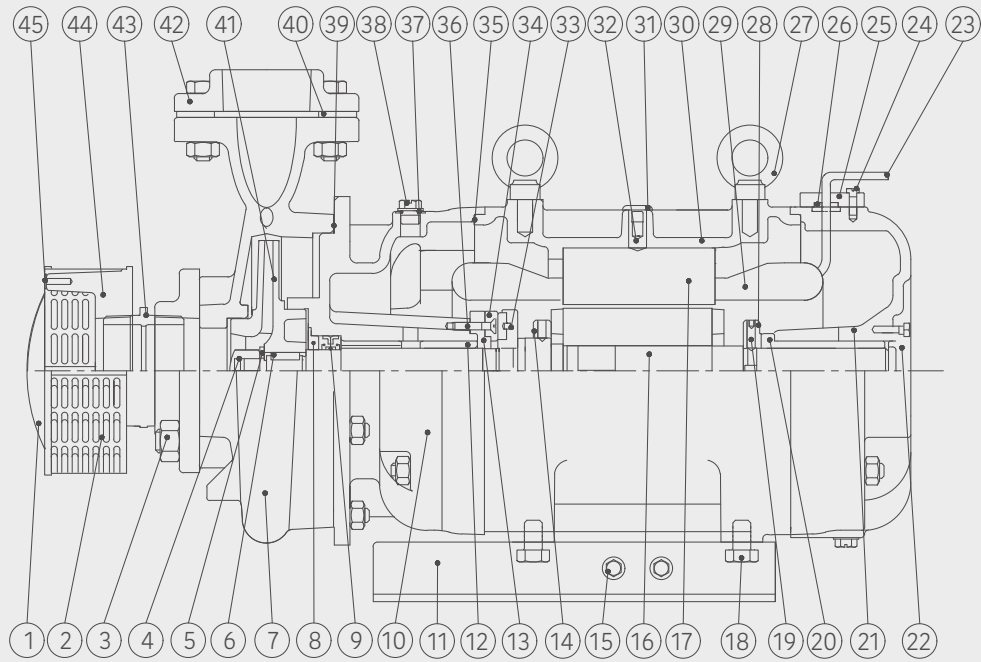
Cross-section view of open well submersible monoblock TSM / TSM Z
